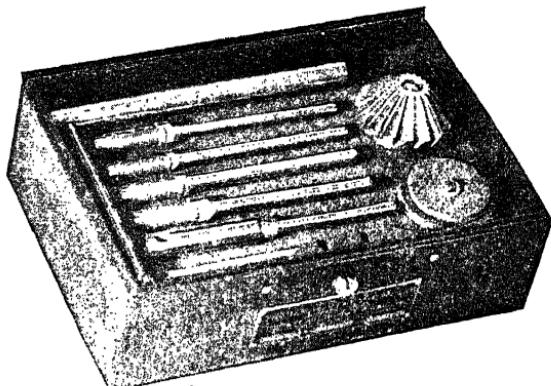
Valve-Seat Refinishing Tool with Set of Arbors
